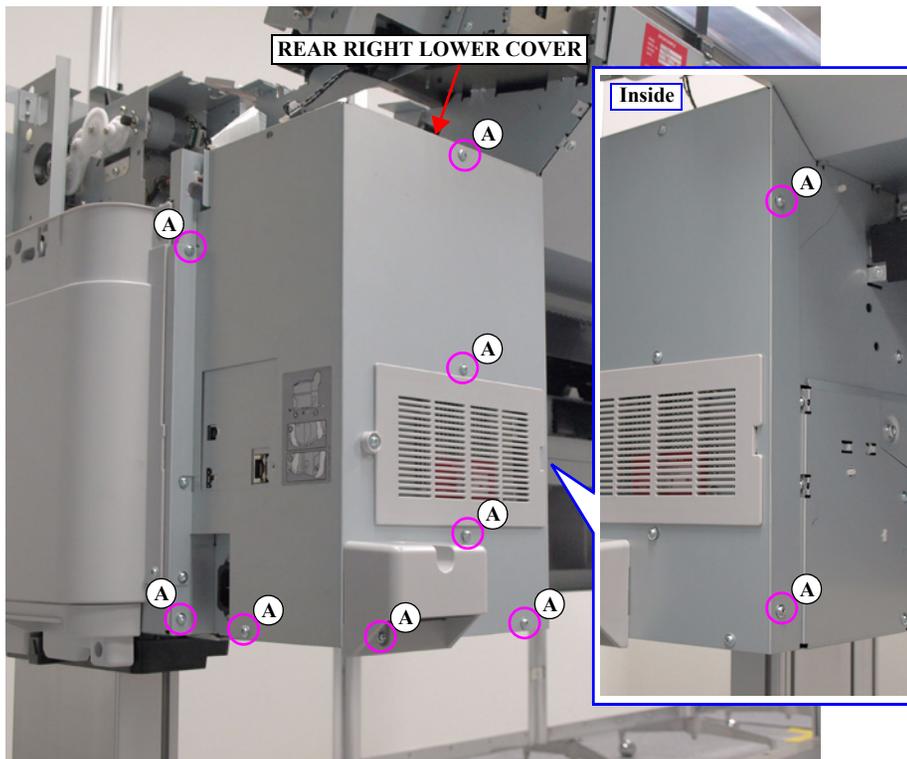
Removing the REAR RIGHT LOWER COVER
